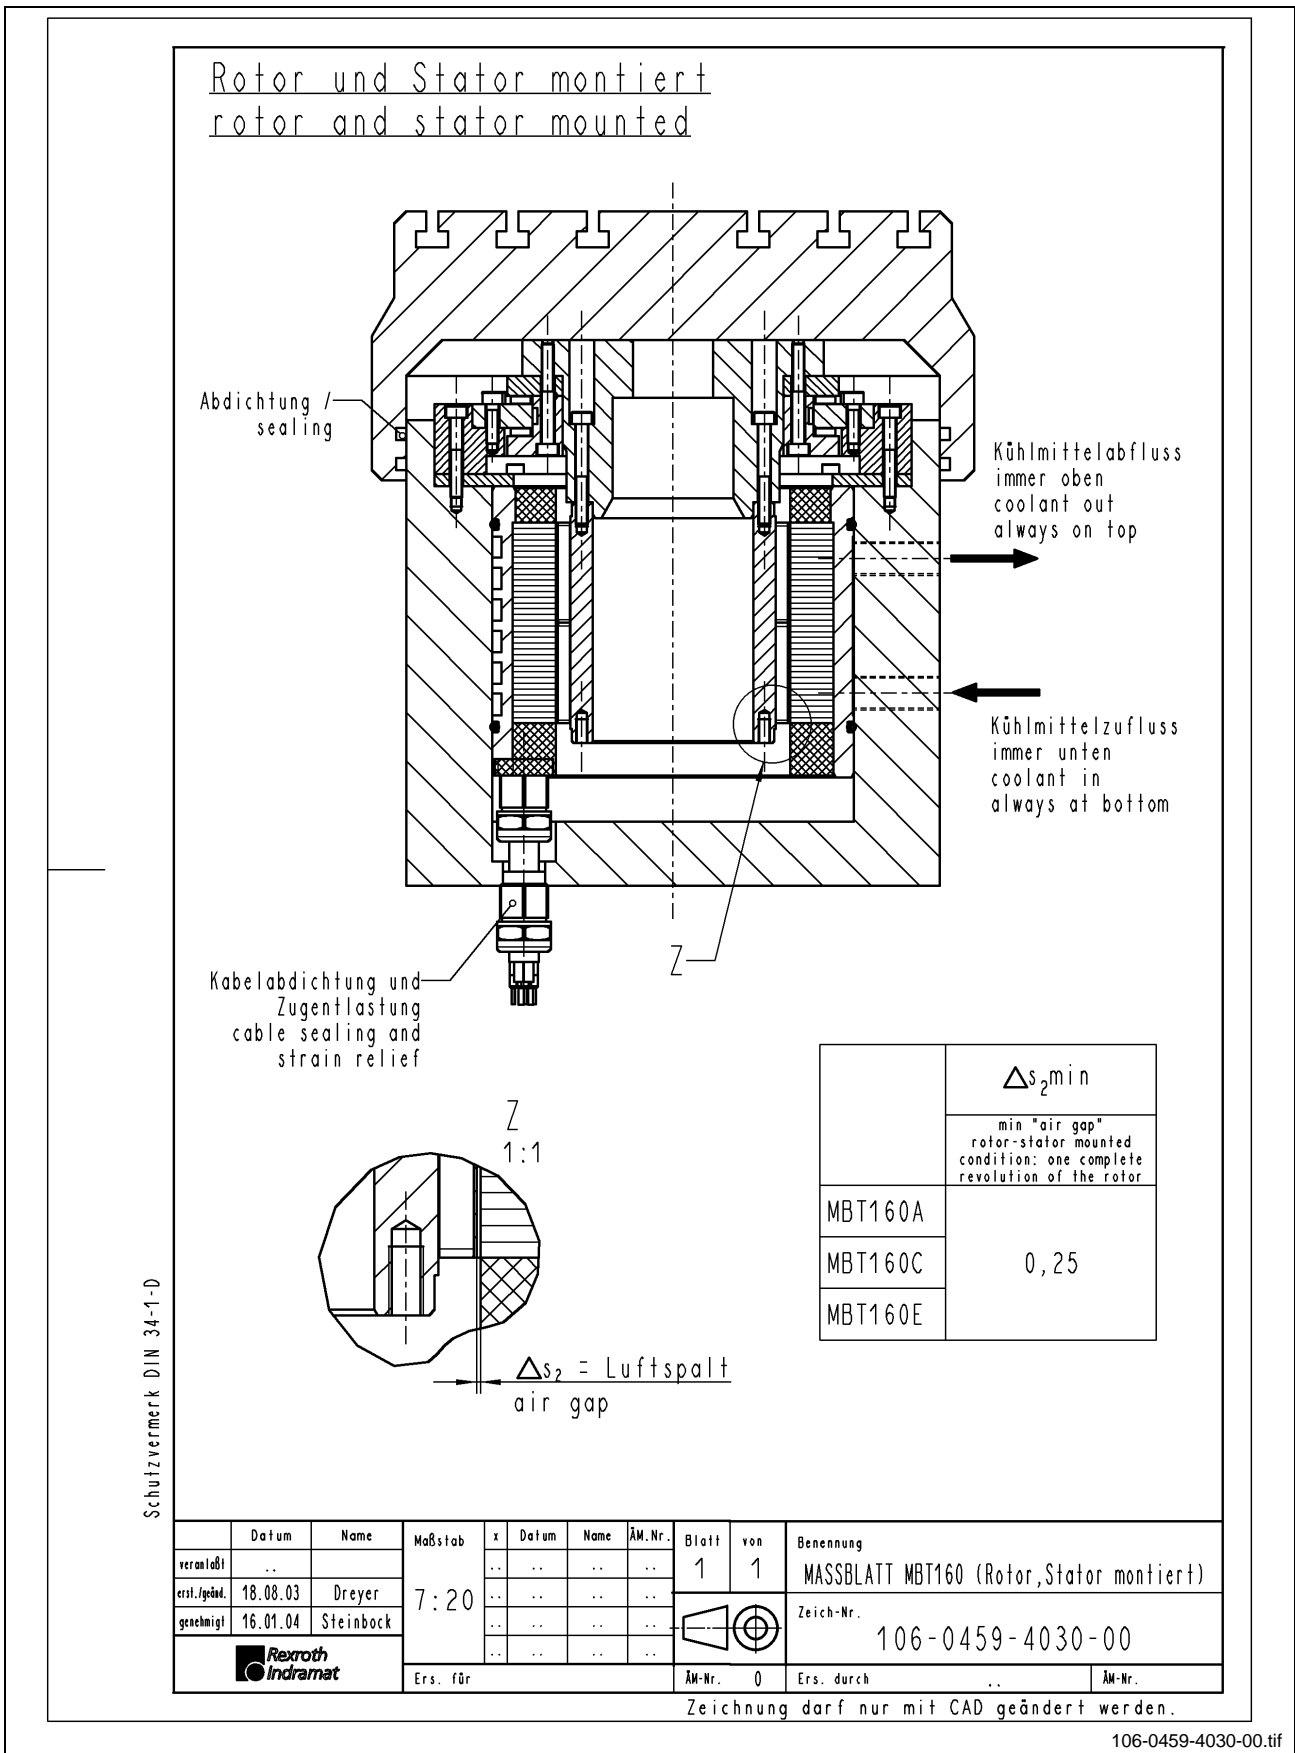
Dimension sheet Rotor and Stator, mounted
